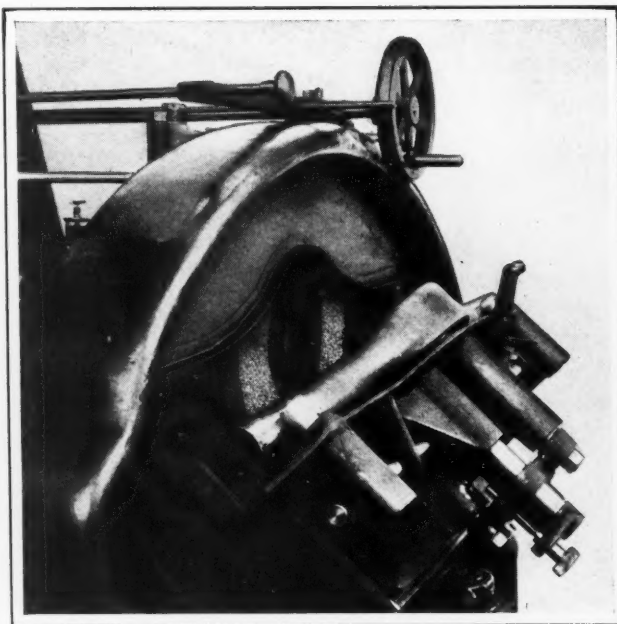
Grinding a Pressed-steel Rear-axle Housing on Two Faces, One at a Time
